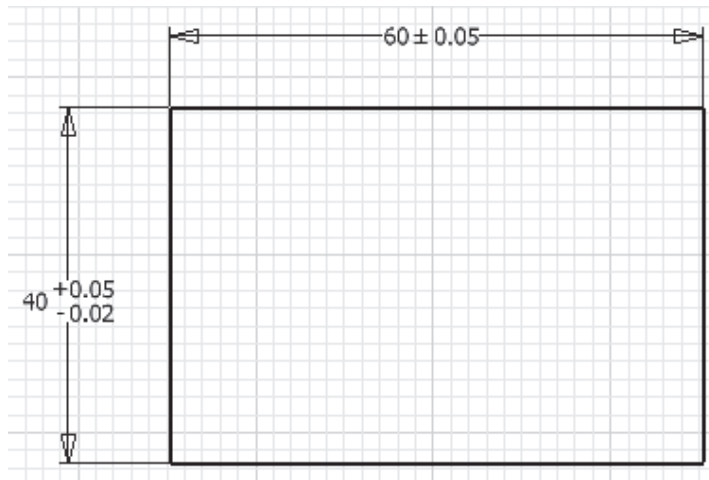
Sketch with tolerance applied to the dimensions
